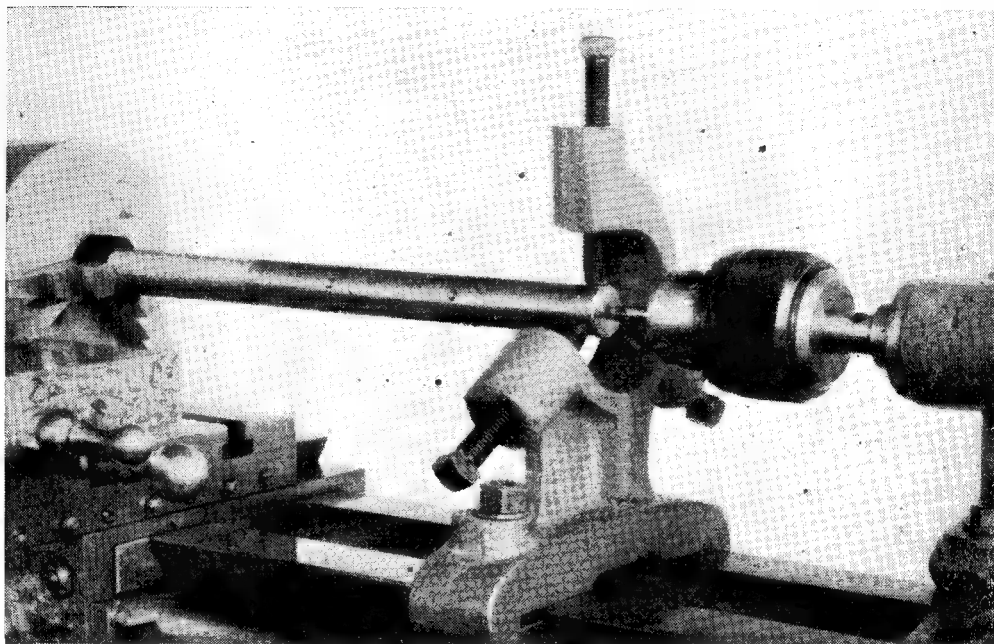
Using the fixed steady when centre-drilling the ends of the bar
